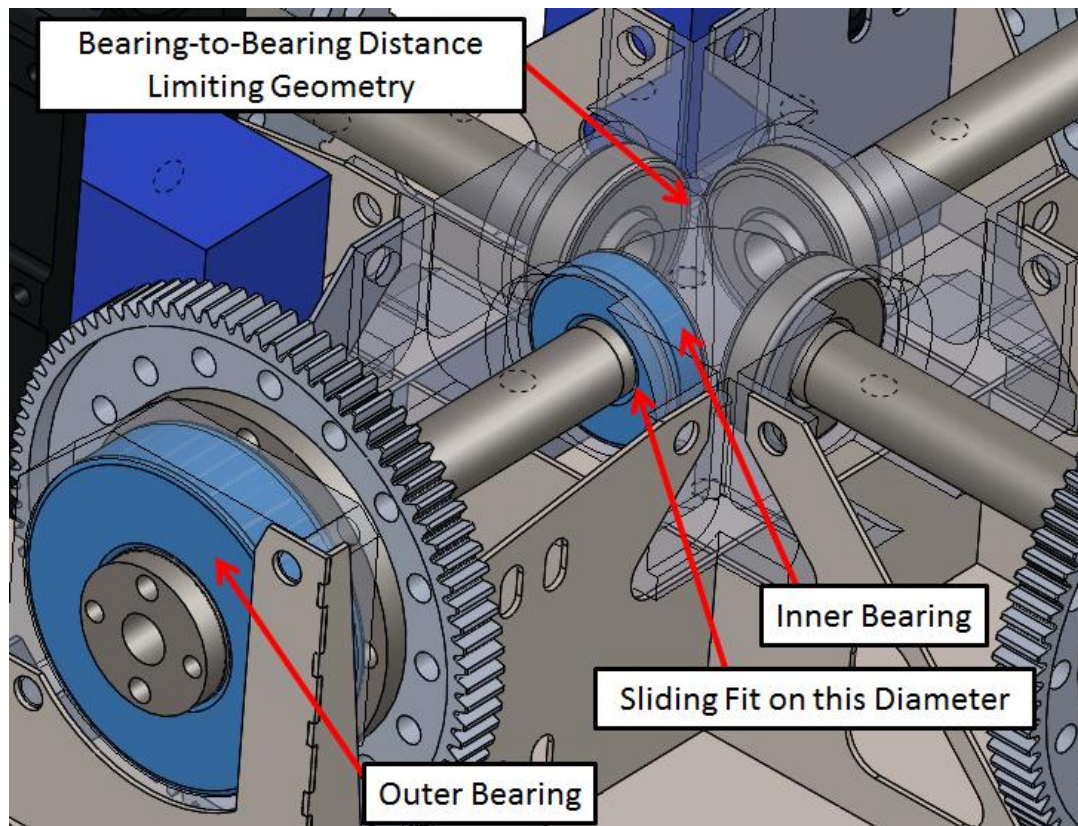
Bearings in Bearing Pockets in Bearing Retainers
